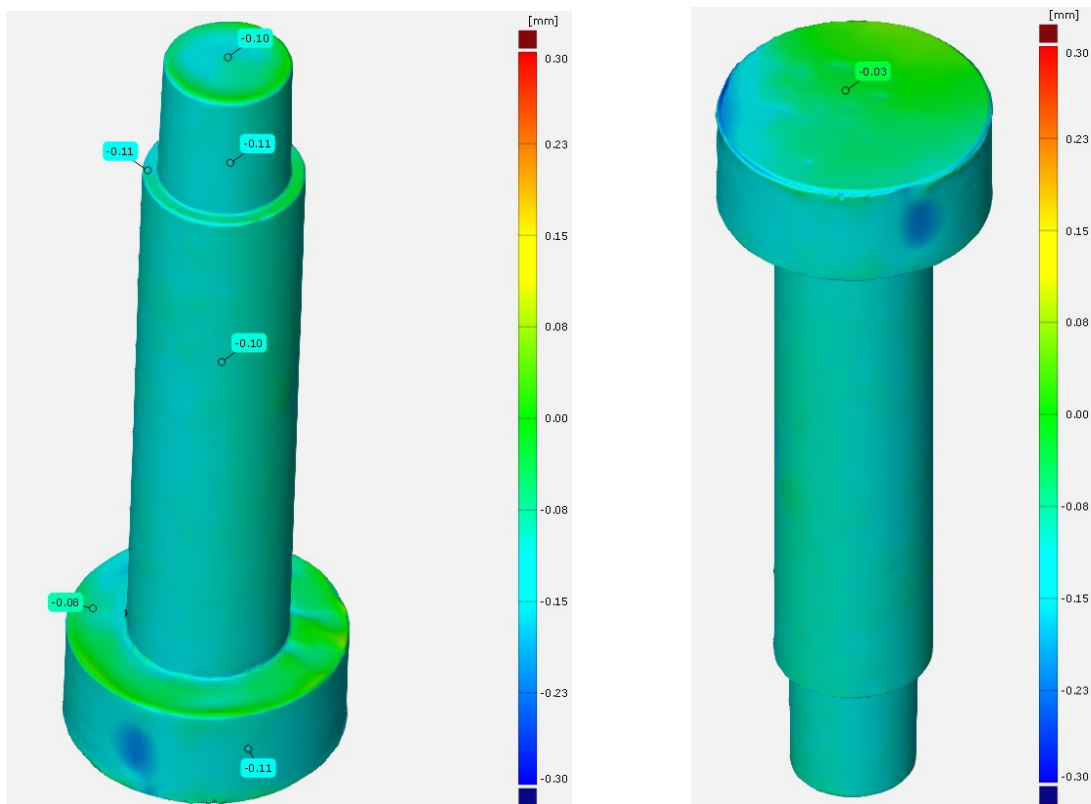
3D scanned tool steel DMLS insert, slightly better dimensional accuracy than the aluminium DMLS insert, but still significant deviation from nominal dimensions
